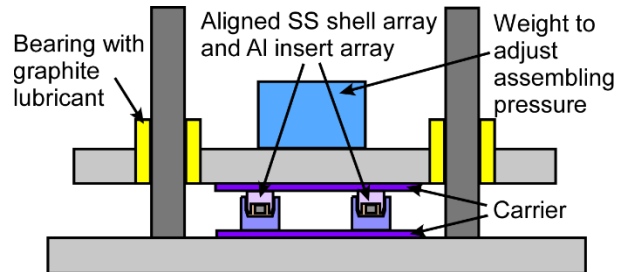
Custom-built fixture to apply controlled and uniform assembly pressure to crimp the Al inserts.
